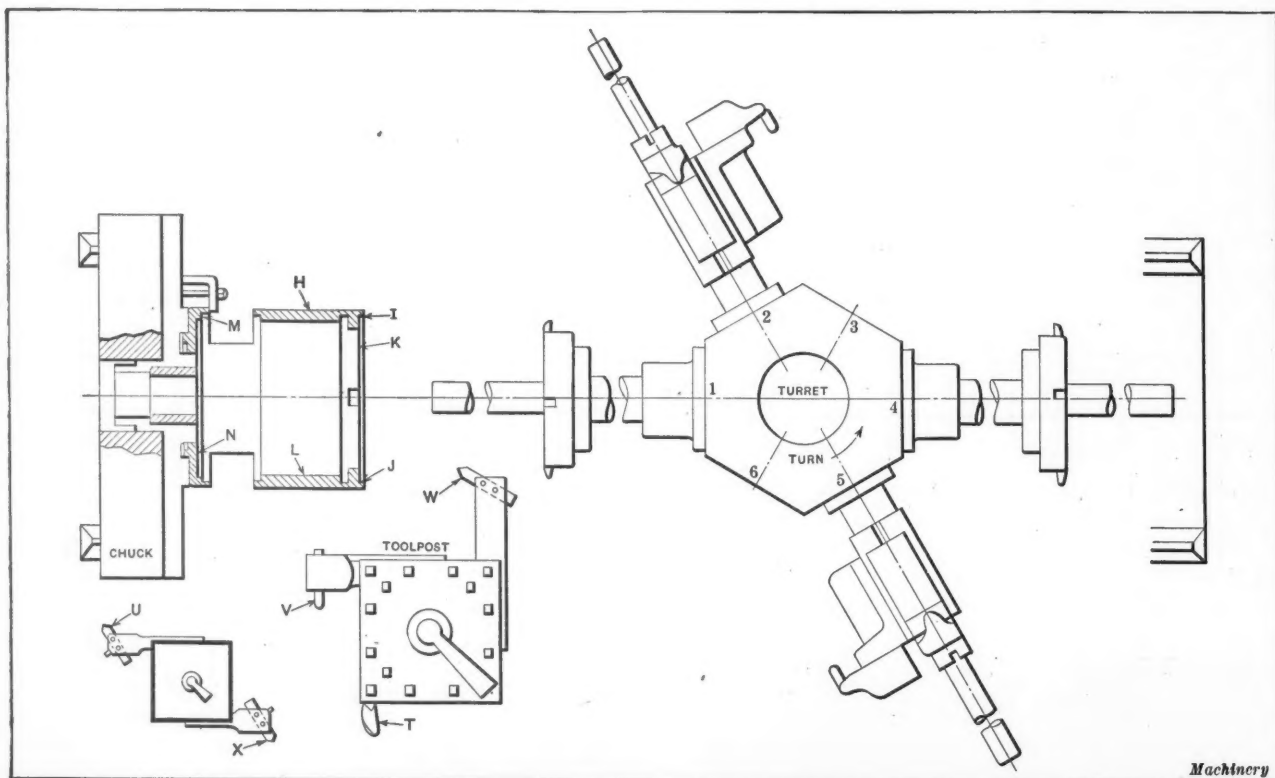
Tooling Equipment for Second Operation on Motor Frame
